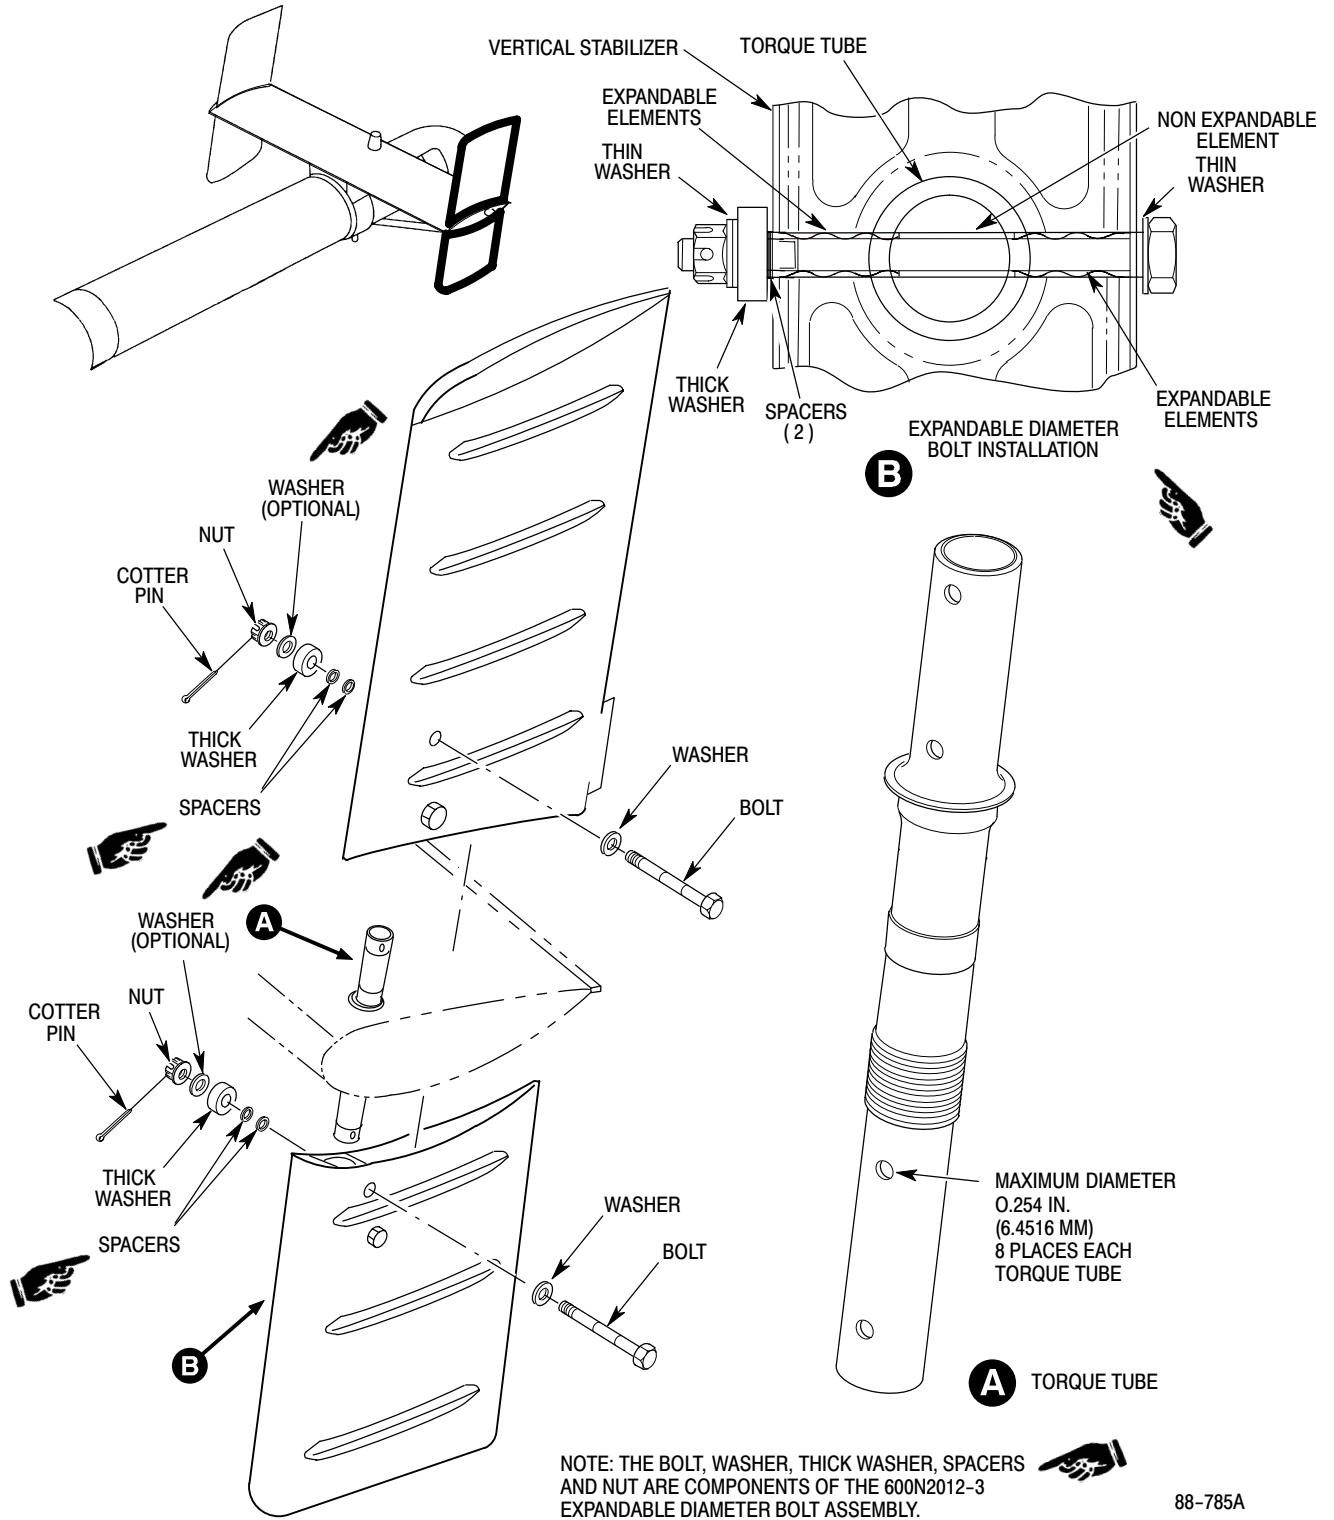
Torque Tube Inspection and Expandable Diameter Bolt Installation
